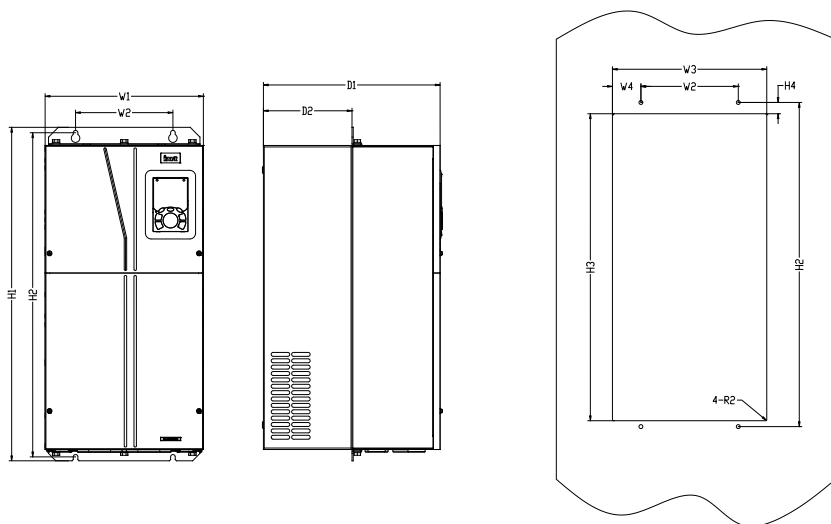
Flange installation diagram of inverters of 220V 18.5–55kW and 460V 75–110kW
